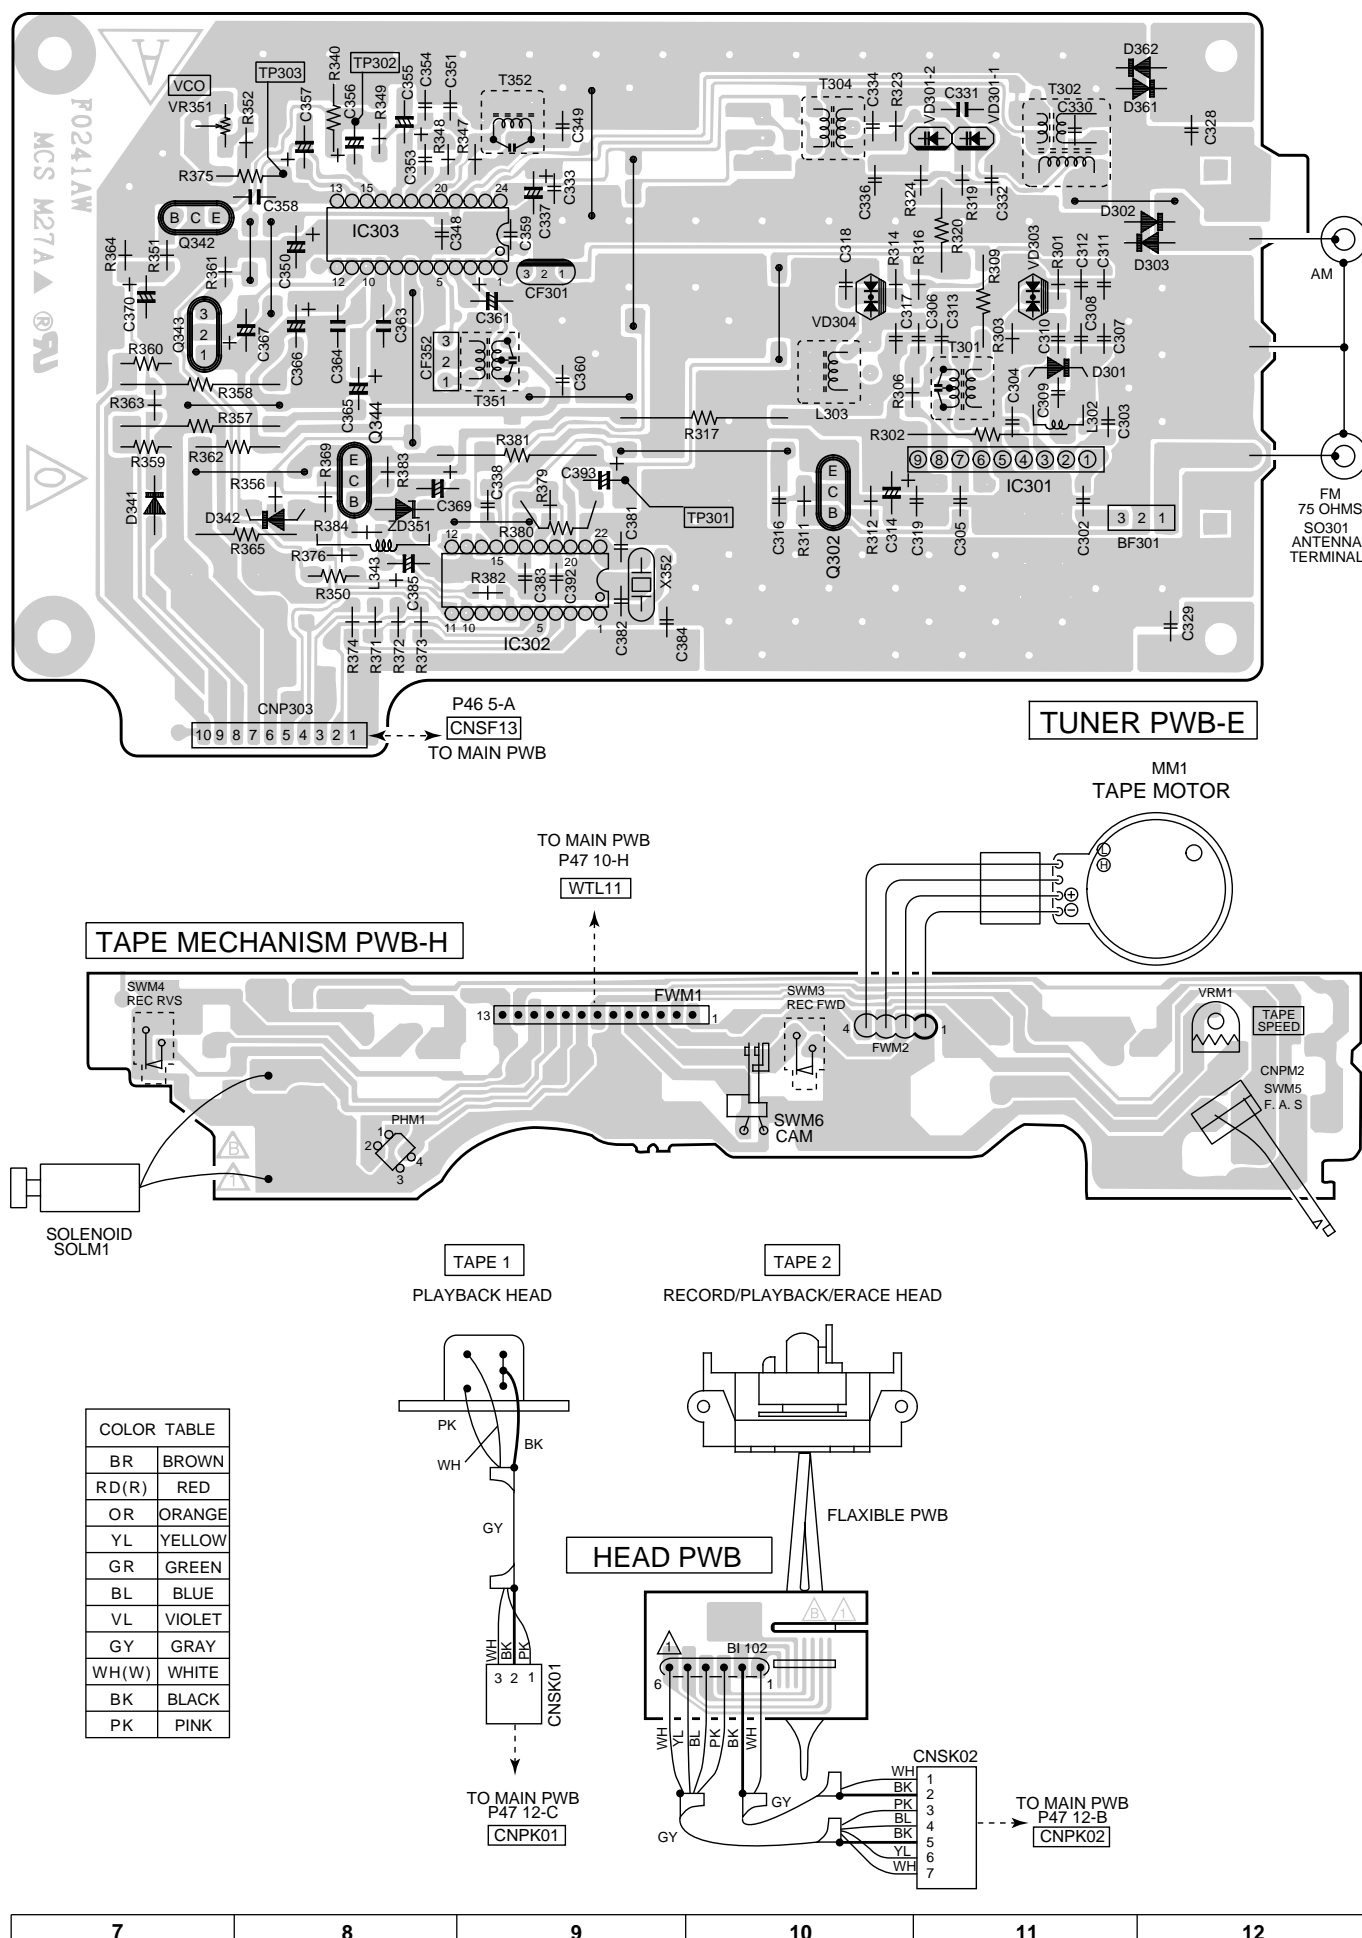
WIRING SIDE OF P.W.BOARD (8/9)
